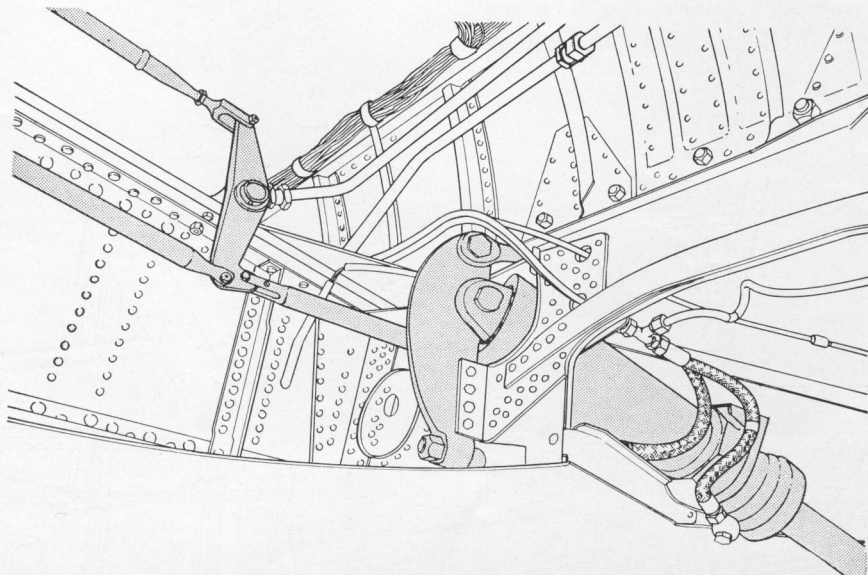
Looking up and forward into the right wheel well at the fitting for the landing gear retracting cylinder, which is attached to the root rib. At the upper left, attached to the main spar top boom, is the aileron bell crank showing the difference in size in the push-pull rod from the control stick (top) and those extending to the ailerons (bottom). Above the retracting cylinder fitting can be seen self-locking nuts, attaching the fuselage skin to the flange on the upper wing structure.
